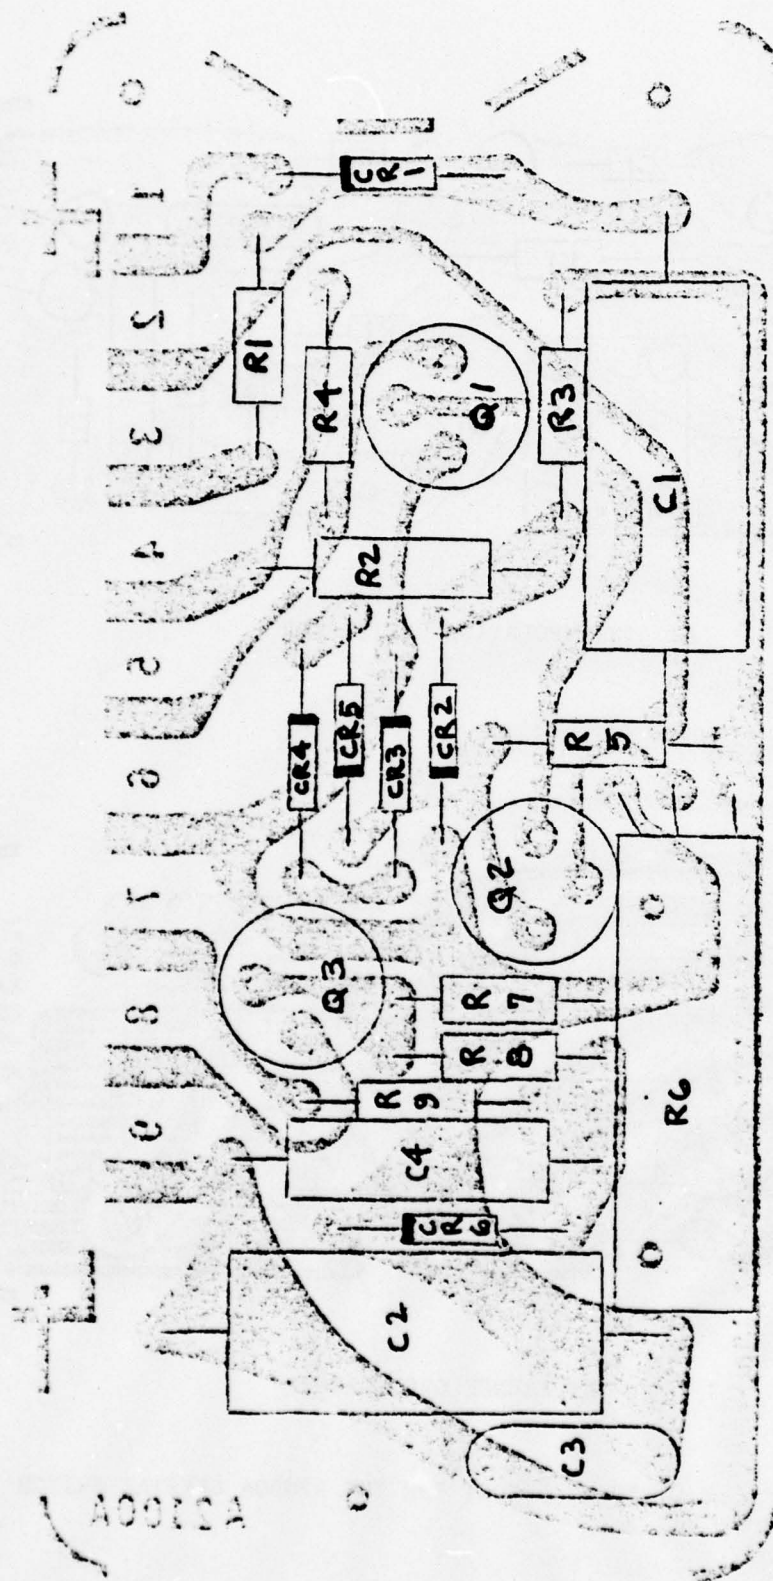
P.C. BOARD LAYOUT FOR THE A2100A VOLTAGE REGULATOR ASSEMBLY
